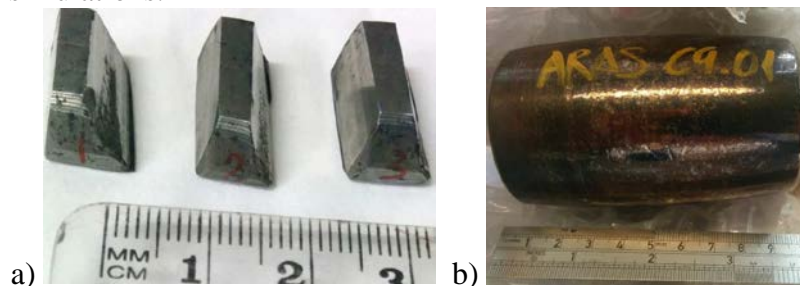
Damaged a) gear teeth and b) roller removed from gearbox.
